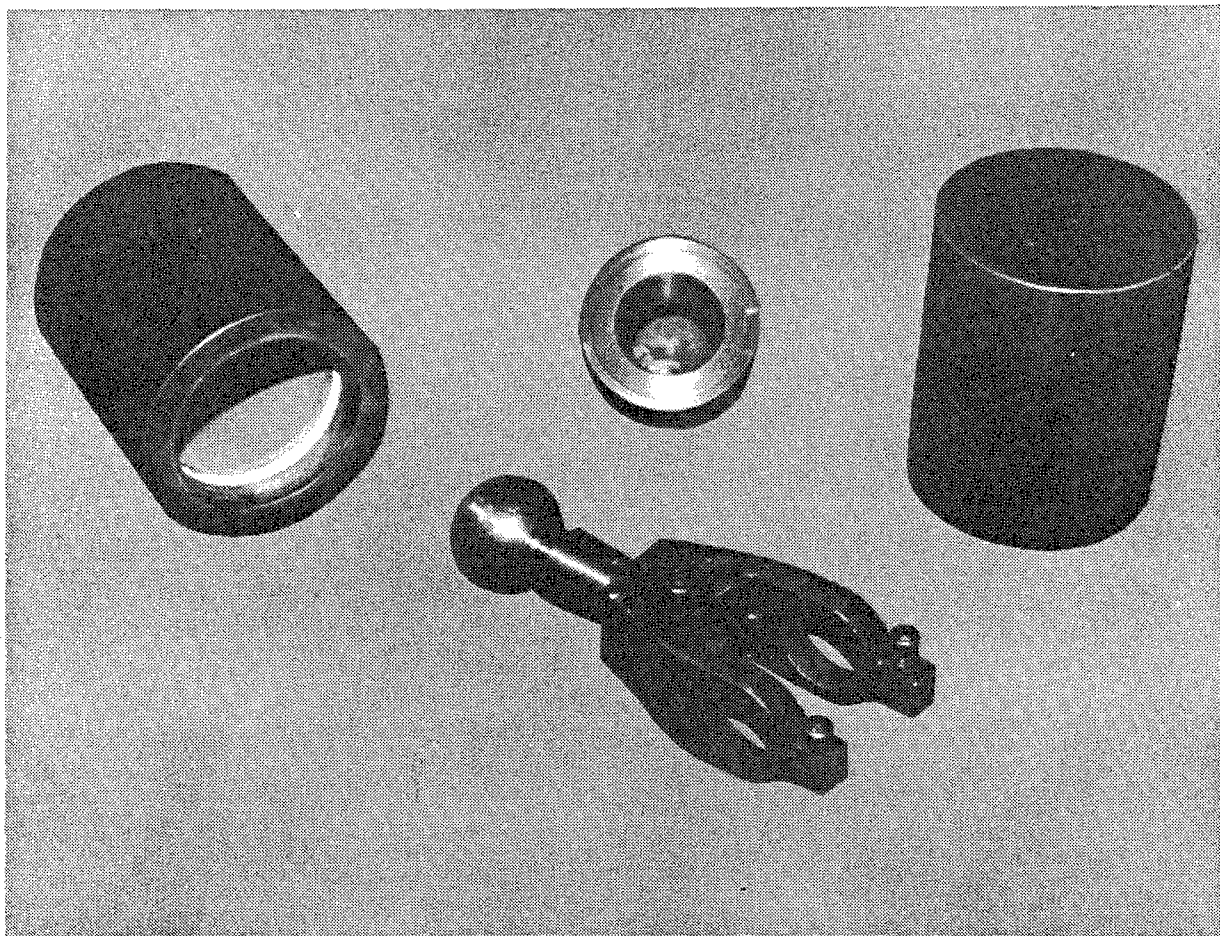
SASC Pistons with Ball and Socket Connecting Rod
